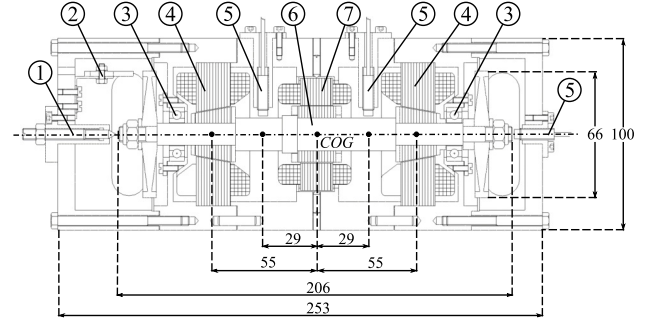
Section view of the machine. 1) Centering tip. 2) Spin speed sensor. 3) Landing bearings. 4) Magnetic actuators. 5) Inductive displacement sensors. 6) Rotor. 7) Electric motor. Dimensions are in mm.
